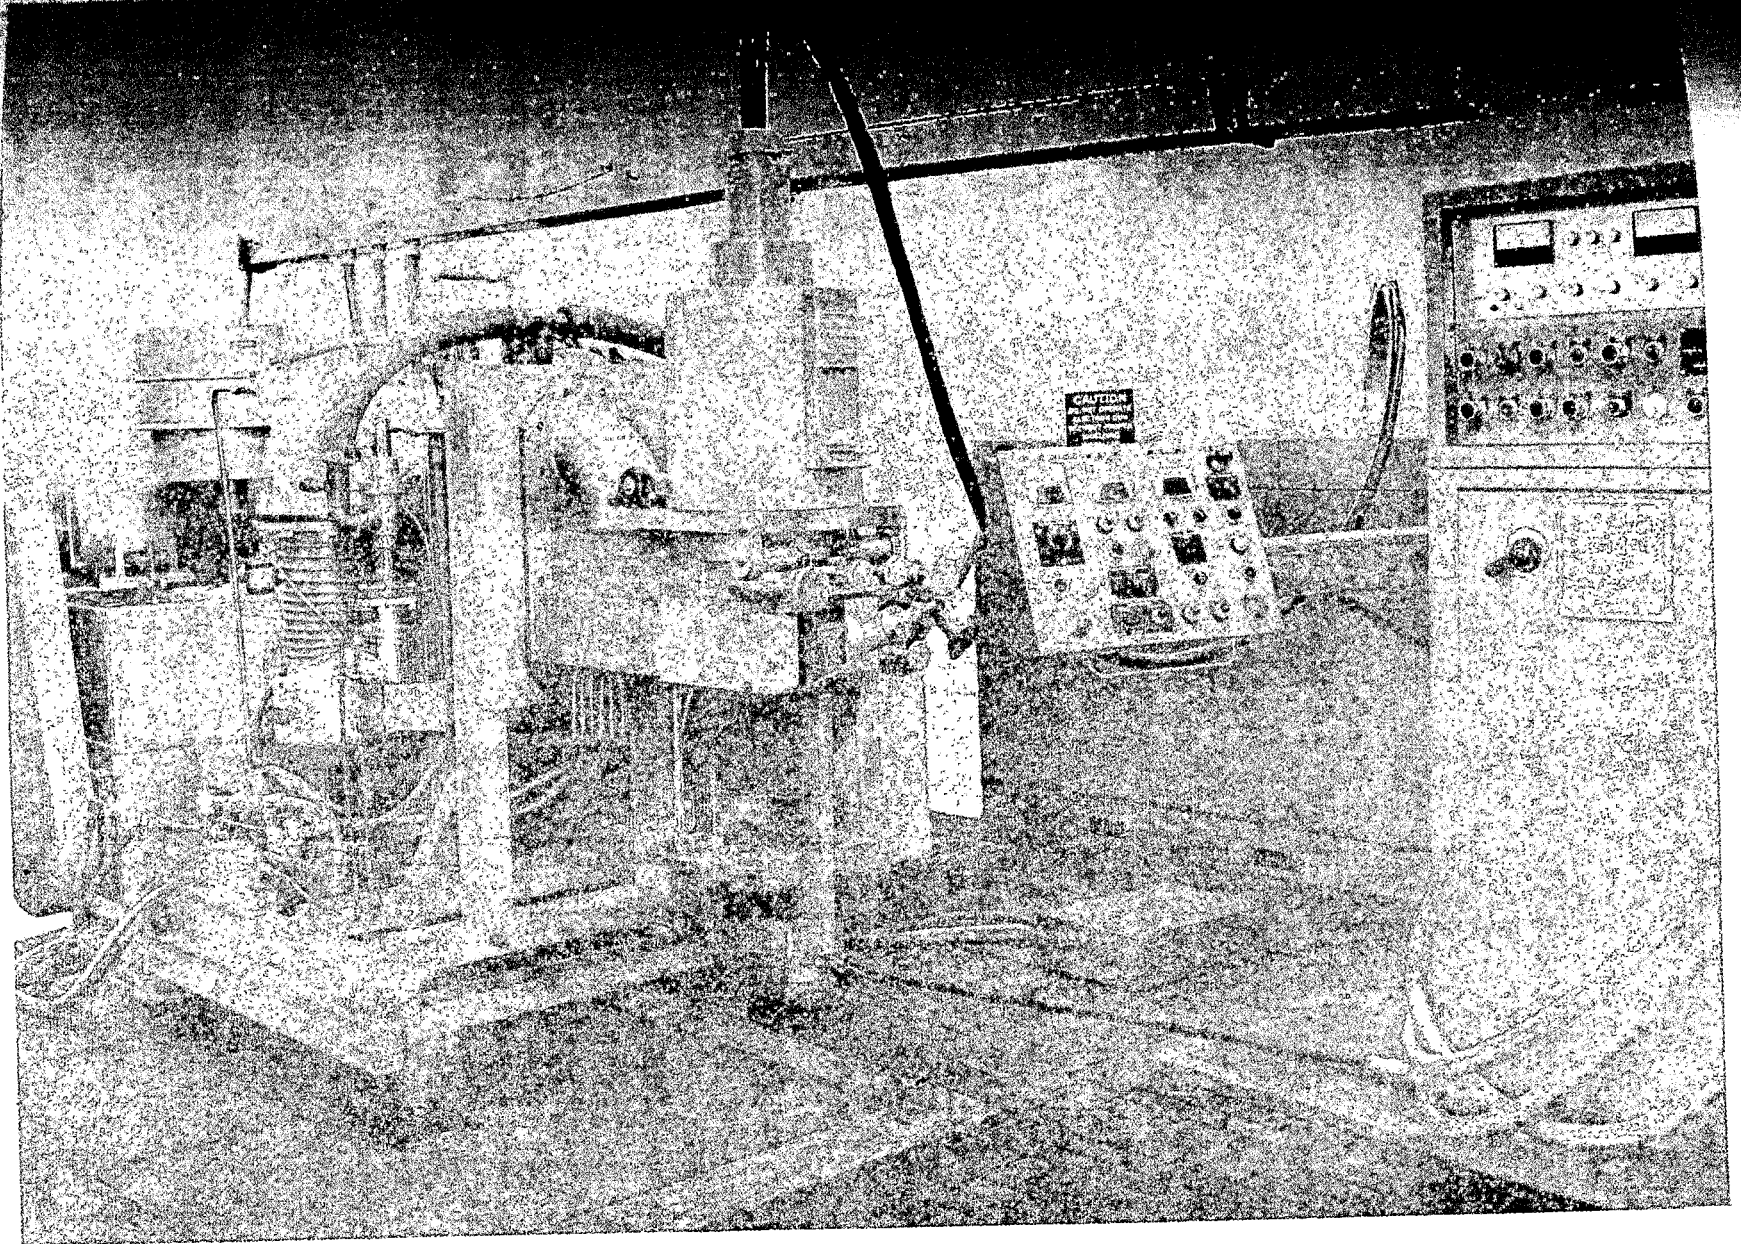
12.0 KW NONVACUUM WELDER
